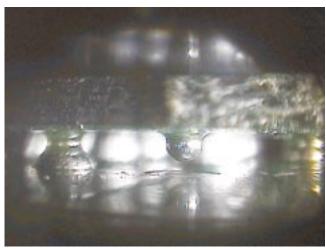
Insufficient Solder and Flux for Proper Joint Formation
